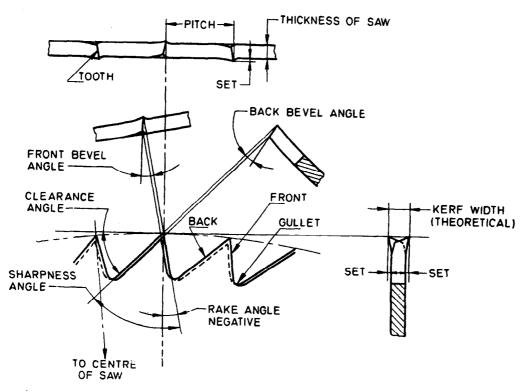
NOMENCLATURE OF CROSS-CUT TEETH FOR DIMENSION CUTTING (DX)
